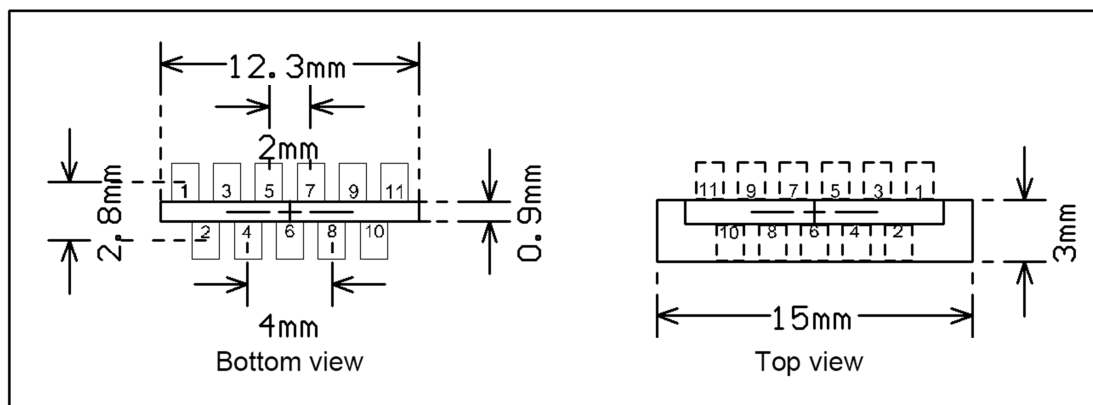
Top and bottom views of the PCB to which WB2S applies
